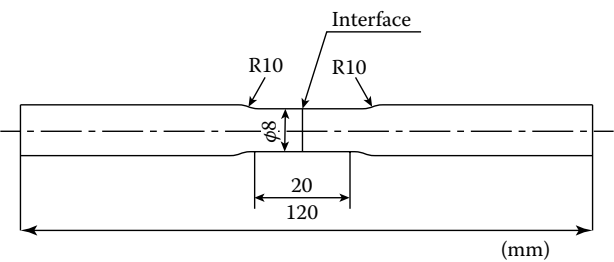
Tensile test specimen machined from the welded joint
